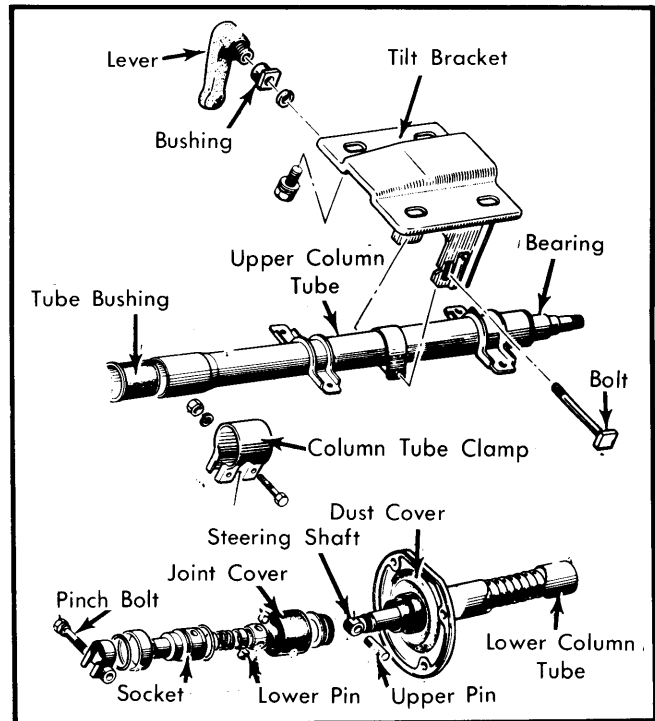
Exploded View of Steering Column Challenger, Sapporo & Colt Wagon
